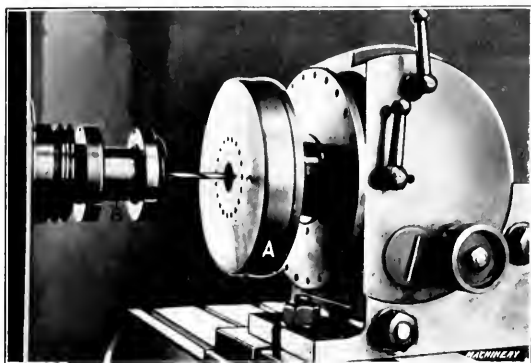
Drilling Solid Armature Disk Dies in a Milling Machine
